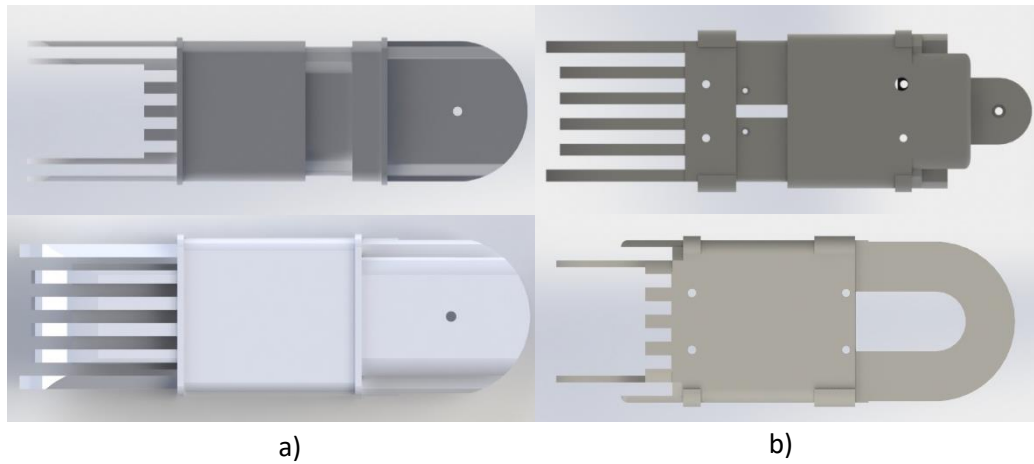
Housing design: a) housing design at the end of the first semester b) final housing design.
